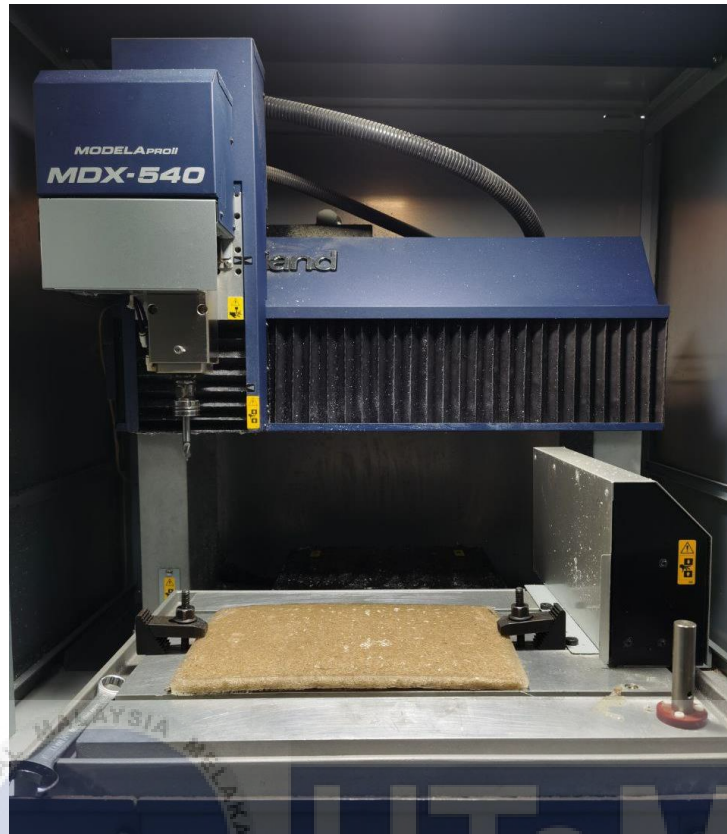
CNC router machine model MODELA PRO2 (MDX-540)
